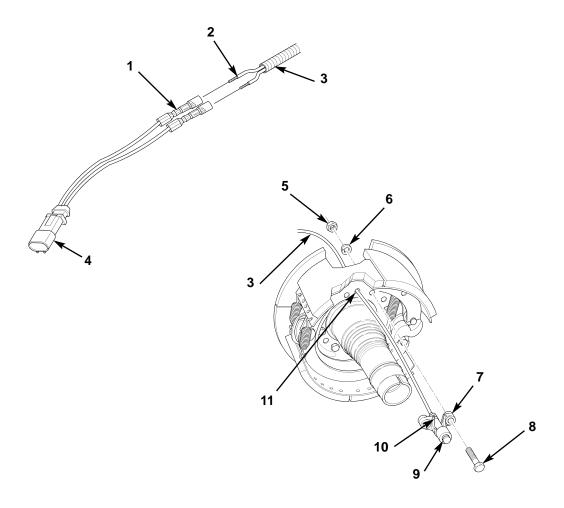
Removing Wheel Sensor and Mounting Bracket from Rear-Rear Axle.
